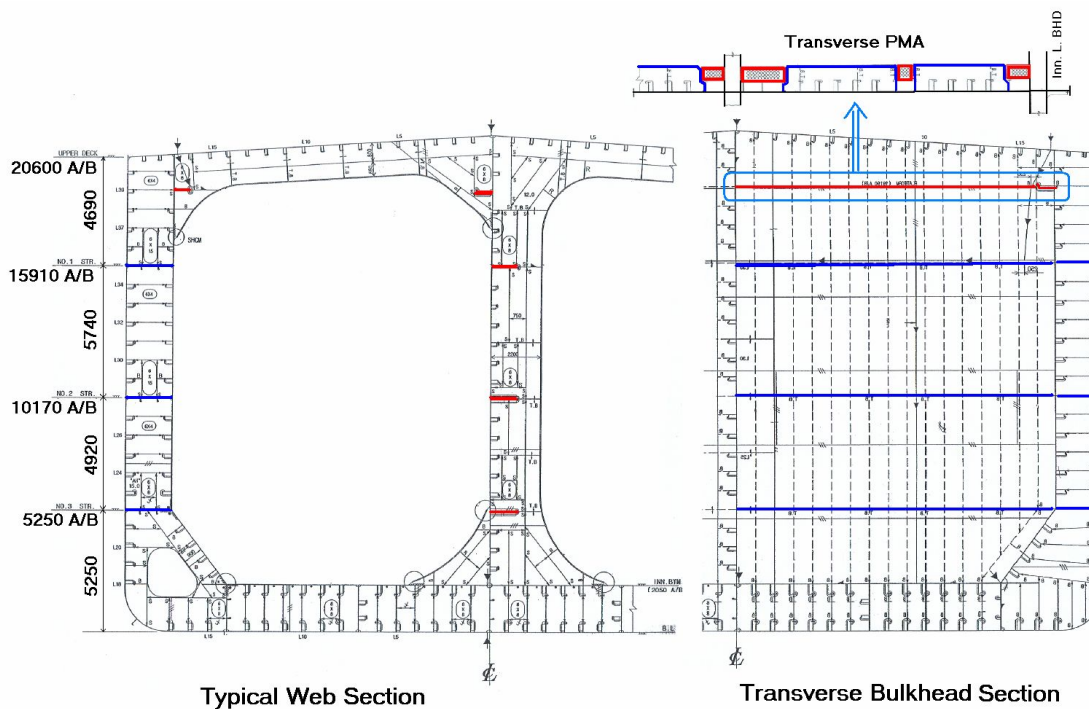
Typical Web Section & Bulkhead Section of 70K Oil Tanker
